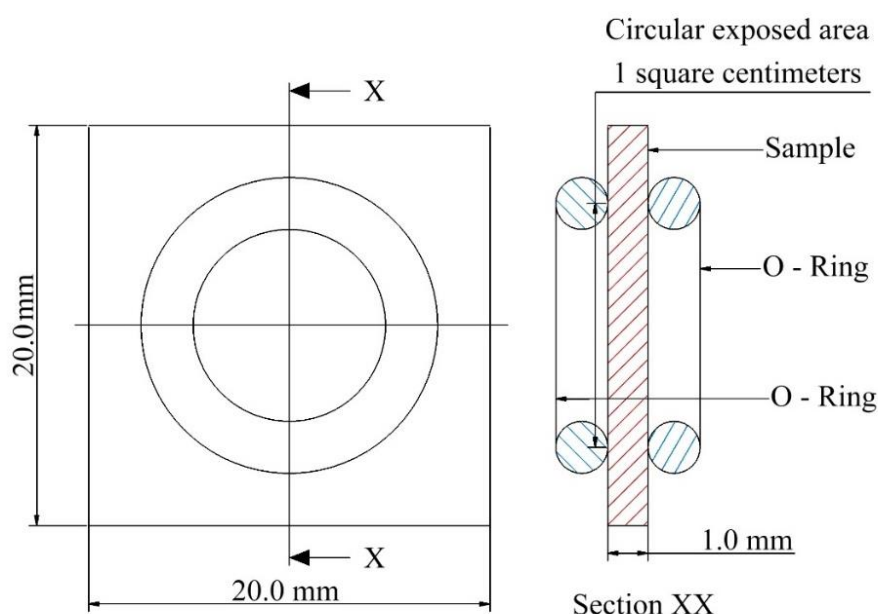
Dimensions of HP sample assembled with O – Rings.
